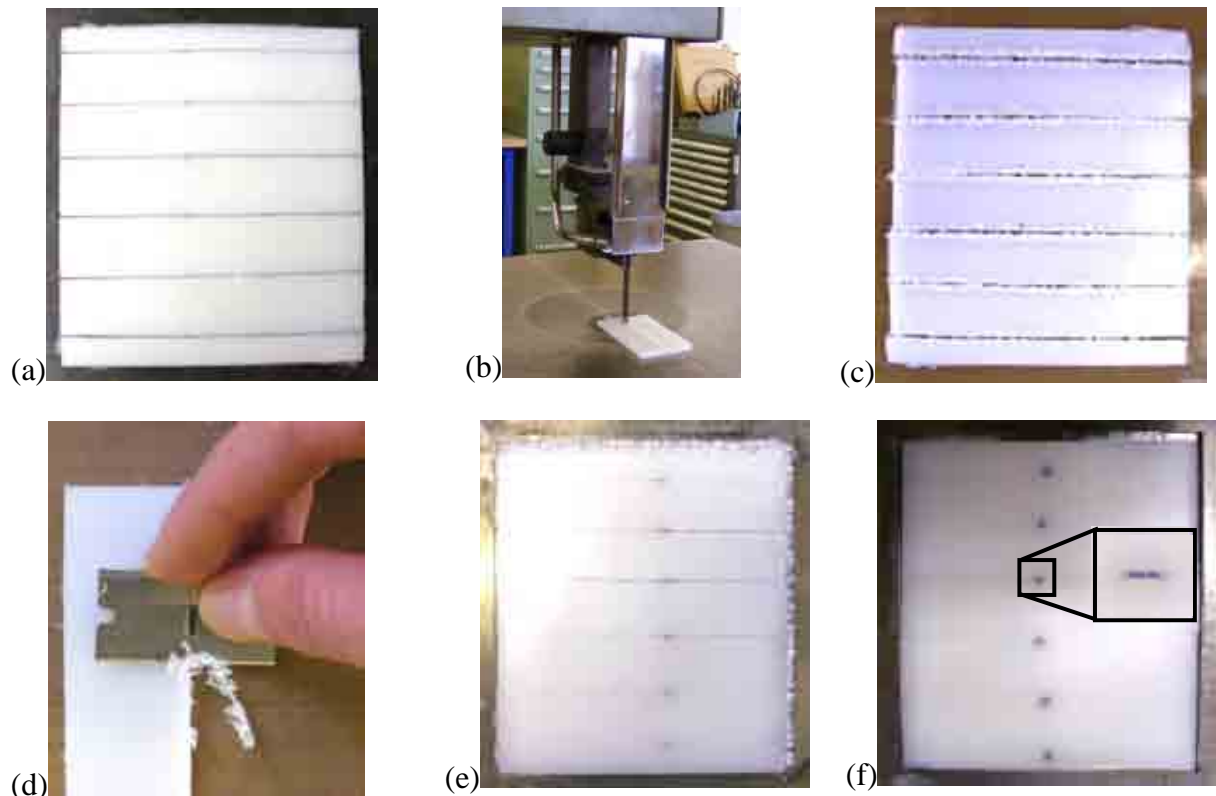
Production of the sheets with chips at the orientation 90/0: (a) marked up polymer sheet, (b) cutting the sheet using a band saw, (c) sheet cut into pieces, (d) removing the excess material from the edges, (e) pieces of polymer in the mould with chips in between, (f) the final processed sheet with zoomed in section of the smaller black square.
